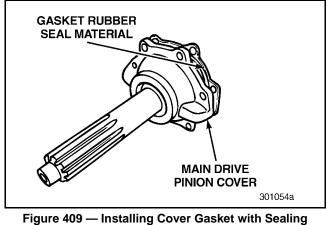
Installing Cover Gasket with Sealing Material Facing Cover
